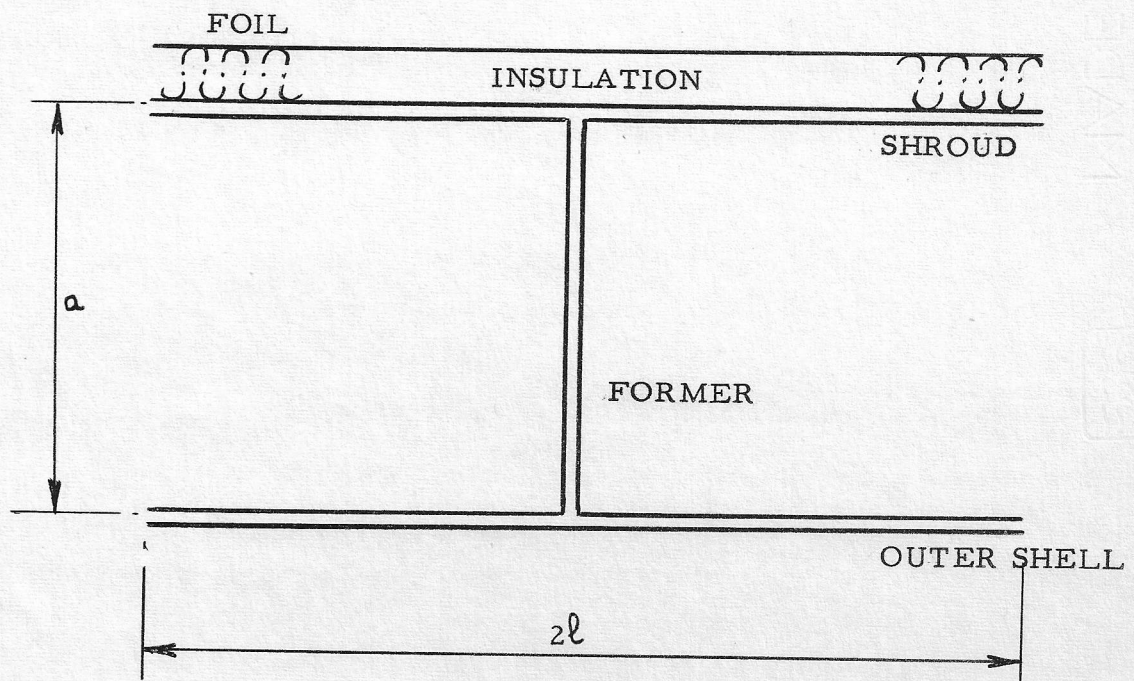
TYPICAL ENGINE BAY STRUCTURE
